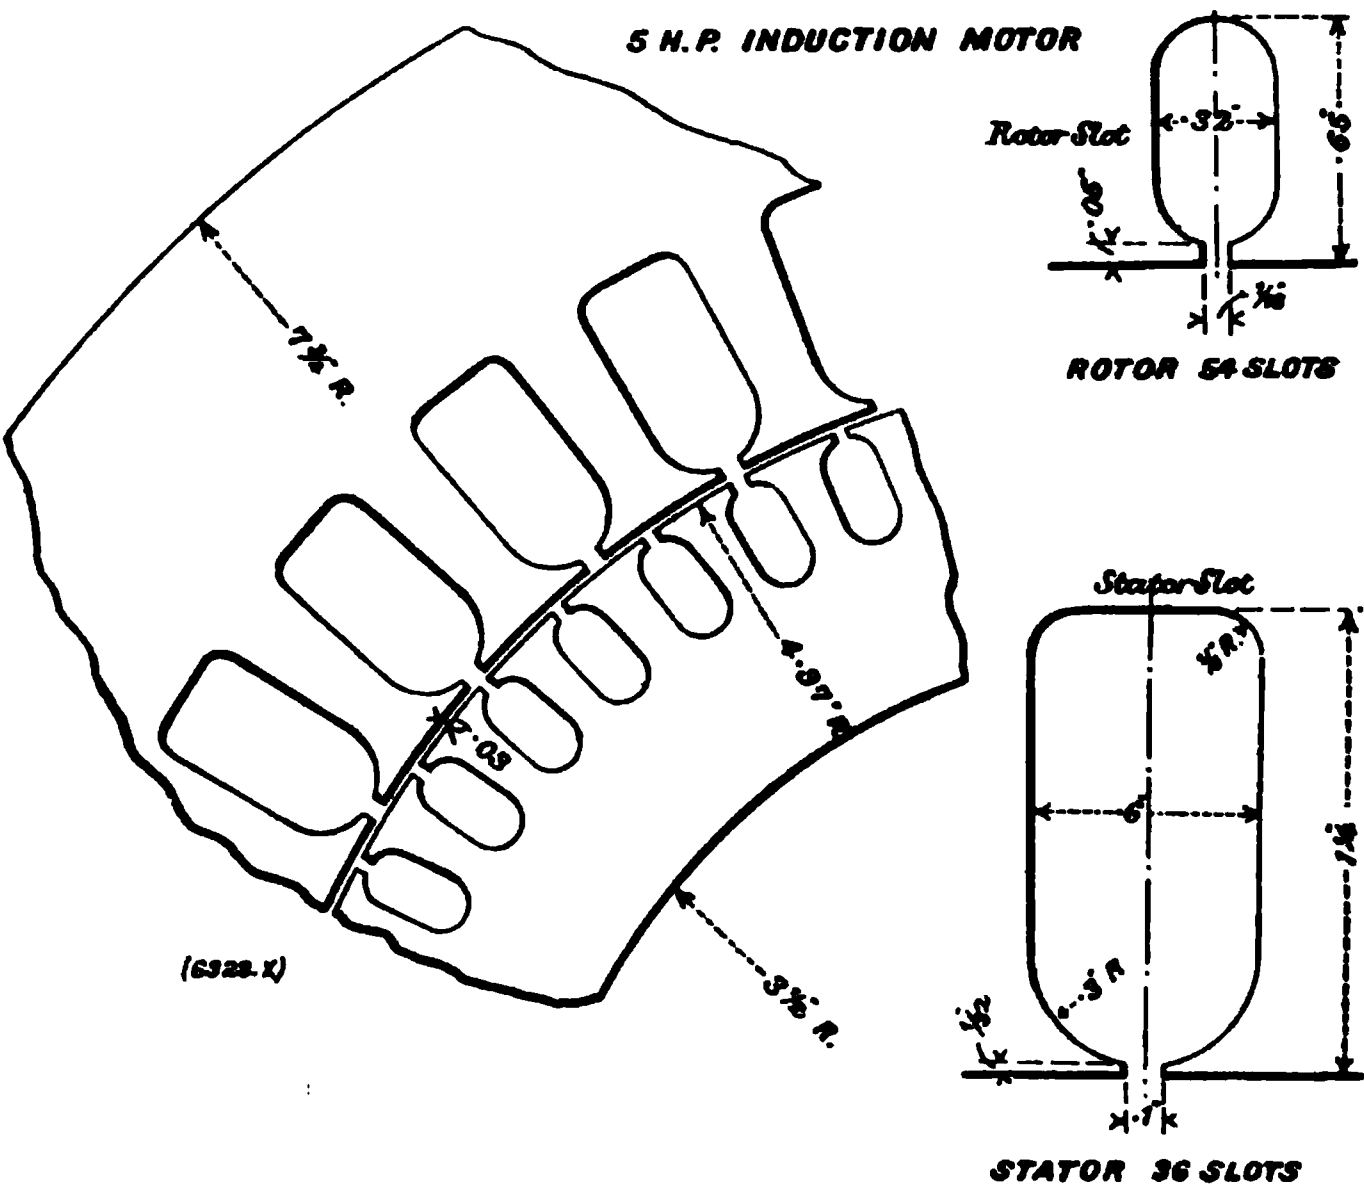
Stator and Rotor Slots, 5 H.P. Motor, by Dick, Kerr & Co.
